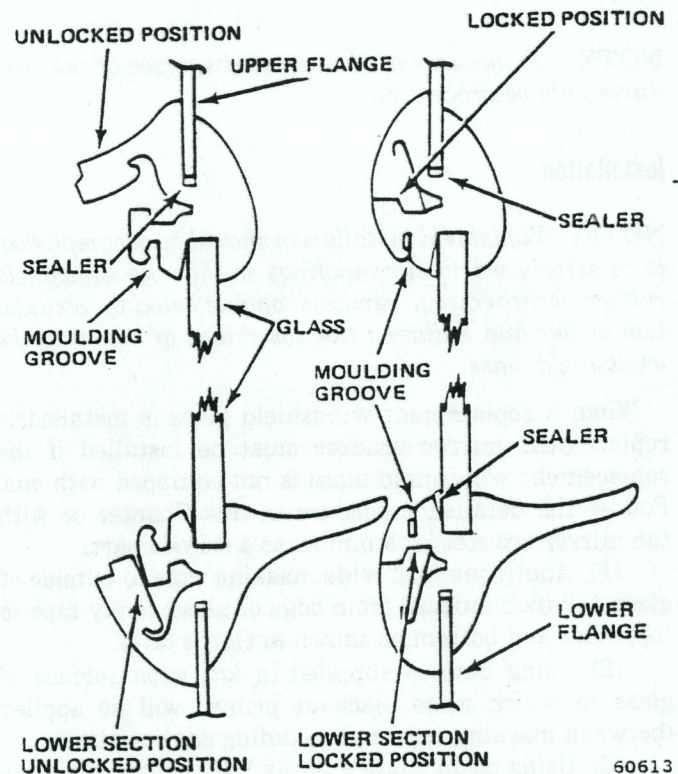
N-2 Windshield Weatherstrip Cross Section—Moulding Removed
